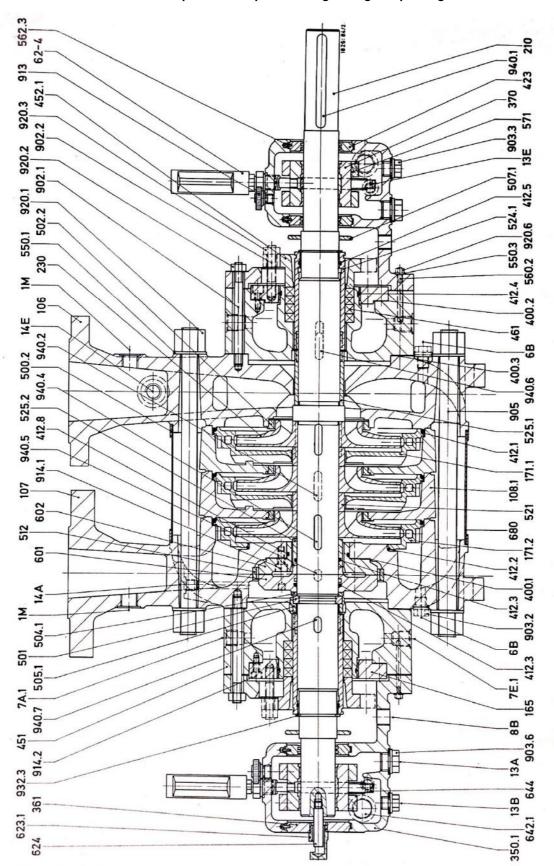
Standard execution sizes 65 up to 150 with plain bearings and gland packing (For specific details for sizes 125, see fig.50)
